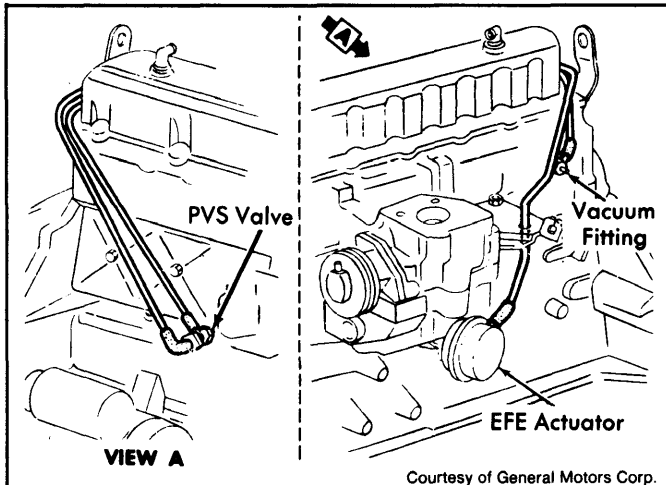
Early Fuel Evaporation System 6-Cylinder Engines
